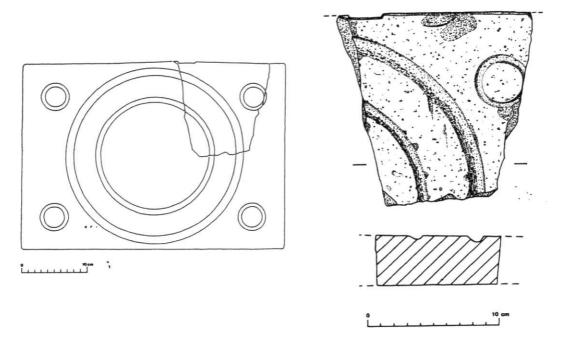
Fragment of a granite mould used for casting ?pewter dishes (see Pl 31)
